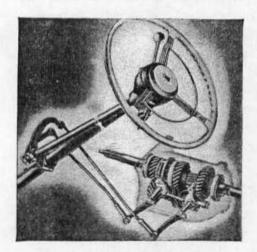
Gearshift, 1940-53 cars with synchromesh transmission
